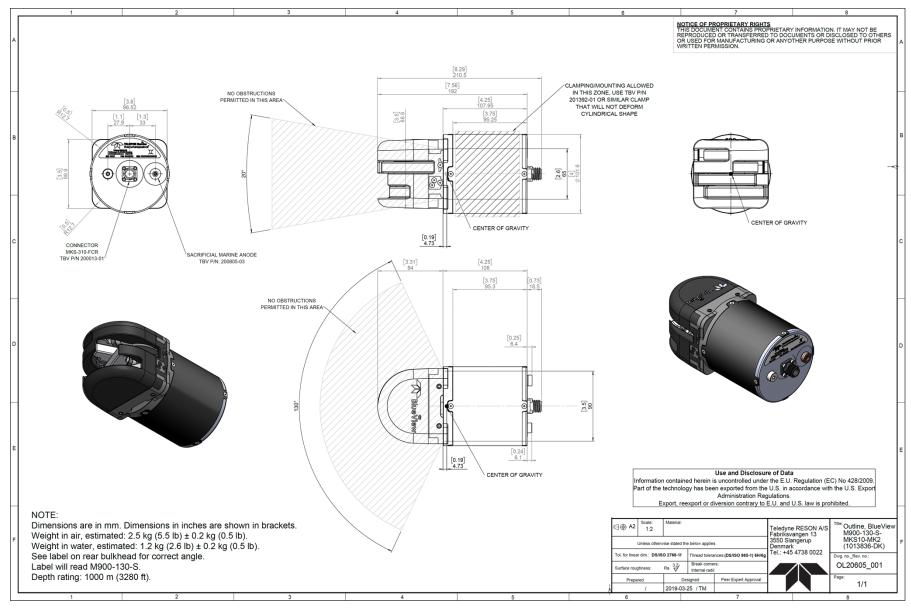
Outline: M900 130° Mk2 – Shallow Water
